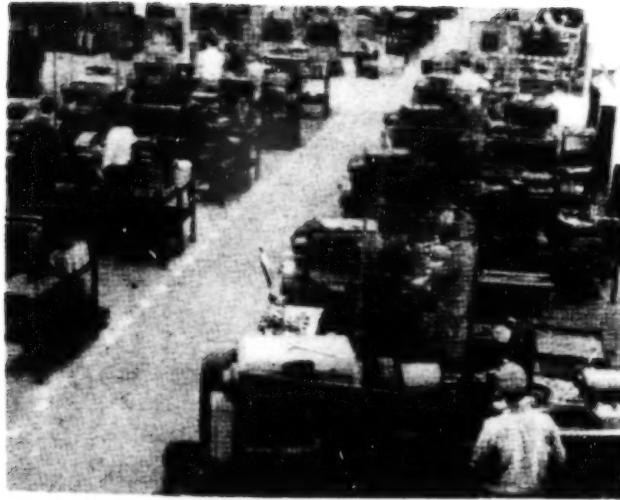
A section of the machine shop of the Kunming Machine Tool Plant
